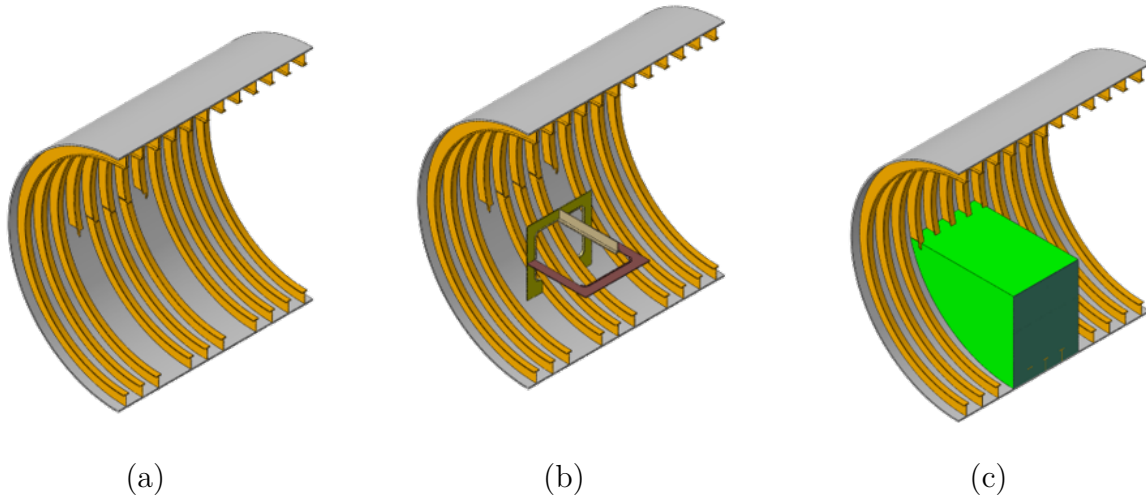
Assembly building: (a) hull with stiffeners; (b) internal tank stiffeners; and (c) tank walls and middle stiffeners
